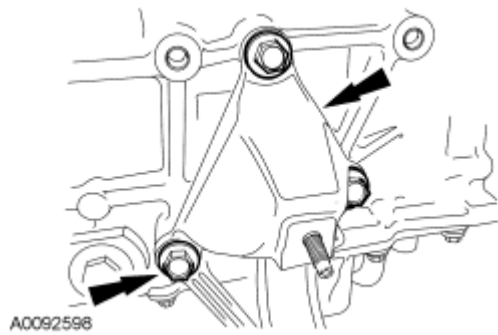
Locating Intermediate Shaft Bearing Bracket And Bolts
